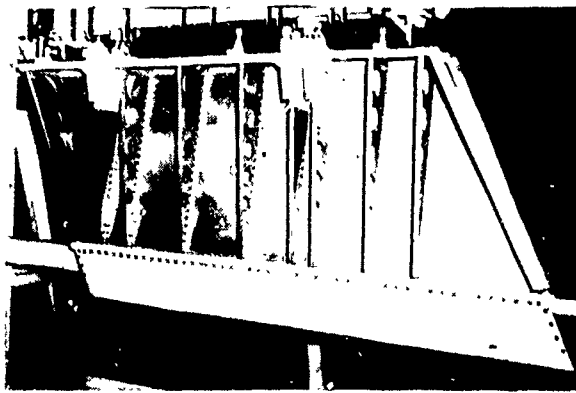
L-1011 Composite Inboard Aileron with the Lower Cover Removed
